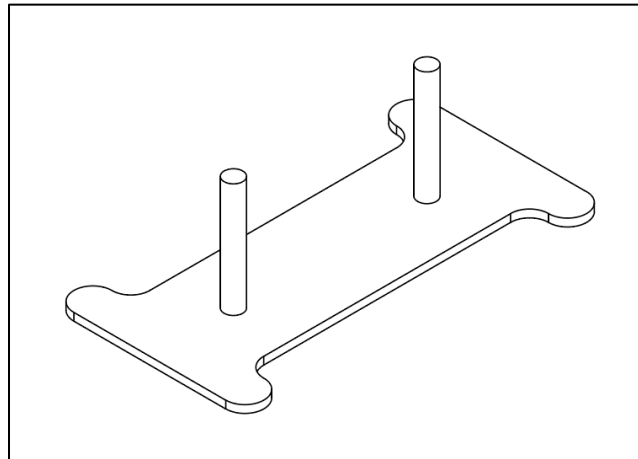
Weldable mounting kit accessory fixing plate MEP-0008 – Optional accessory
